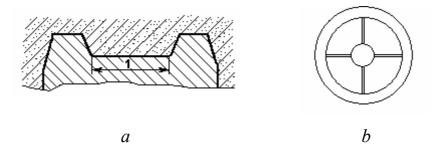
Shrinkage is prevented by mould (a); non-uniform shrinkage (b)
